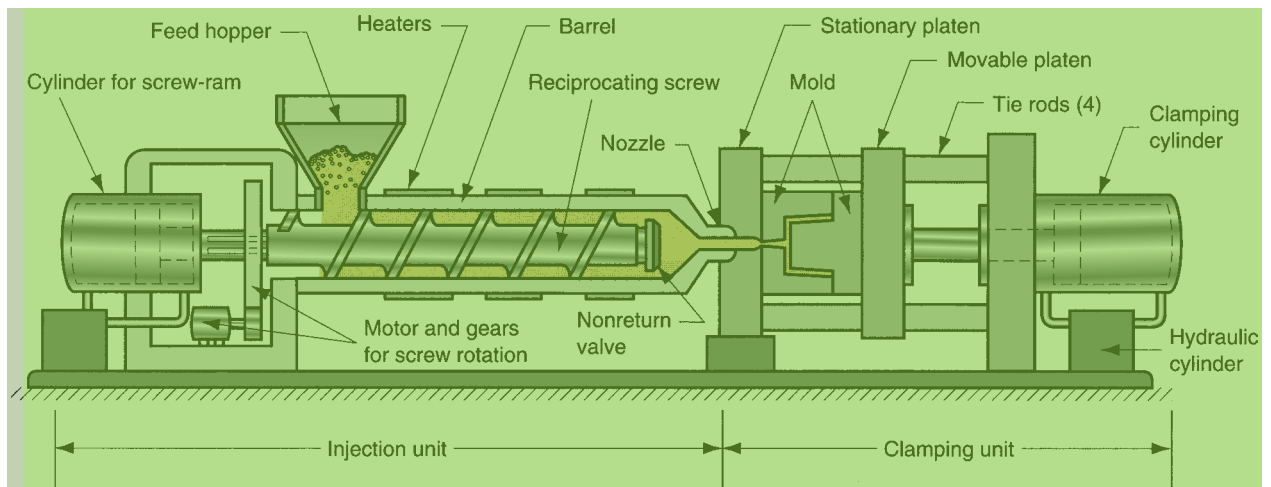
Diagram of an injection molding machine, reciprocating screw type (some mechanical details are simplified).
